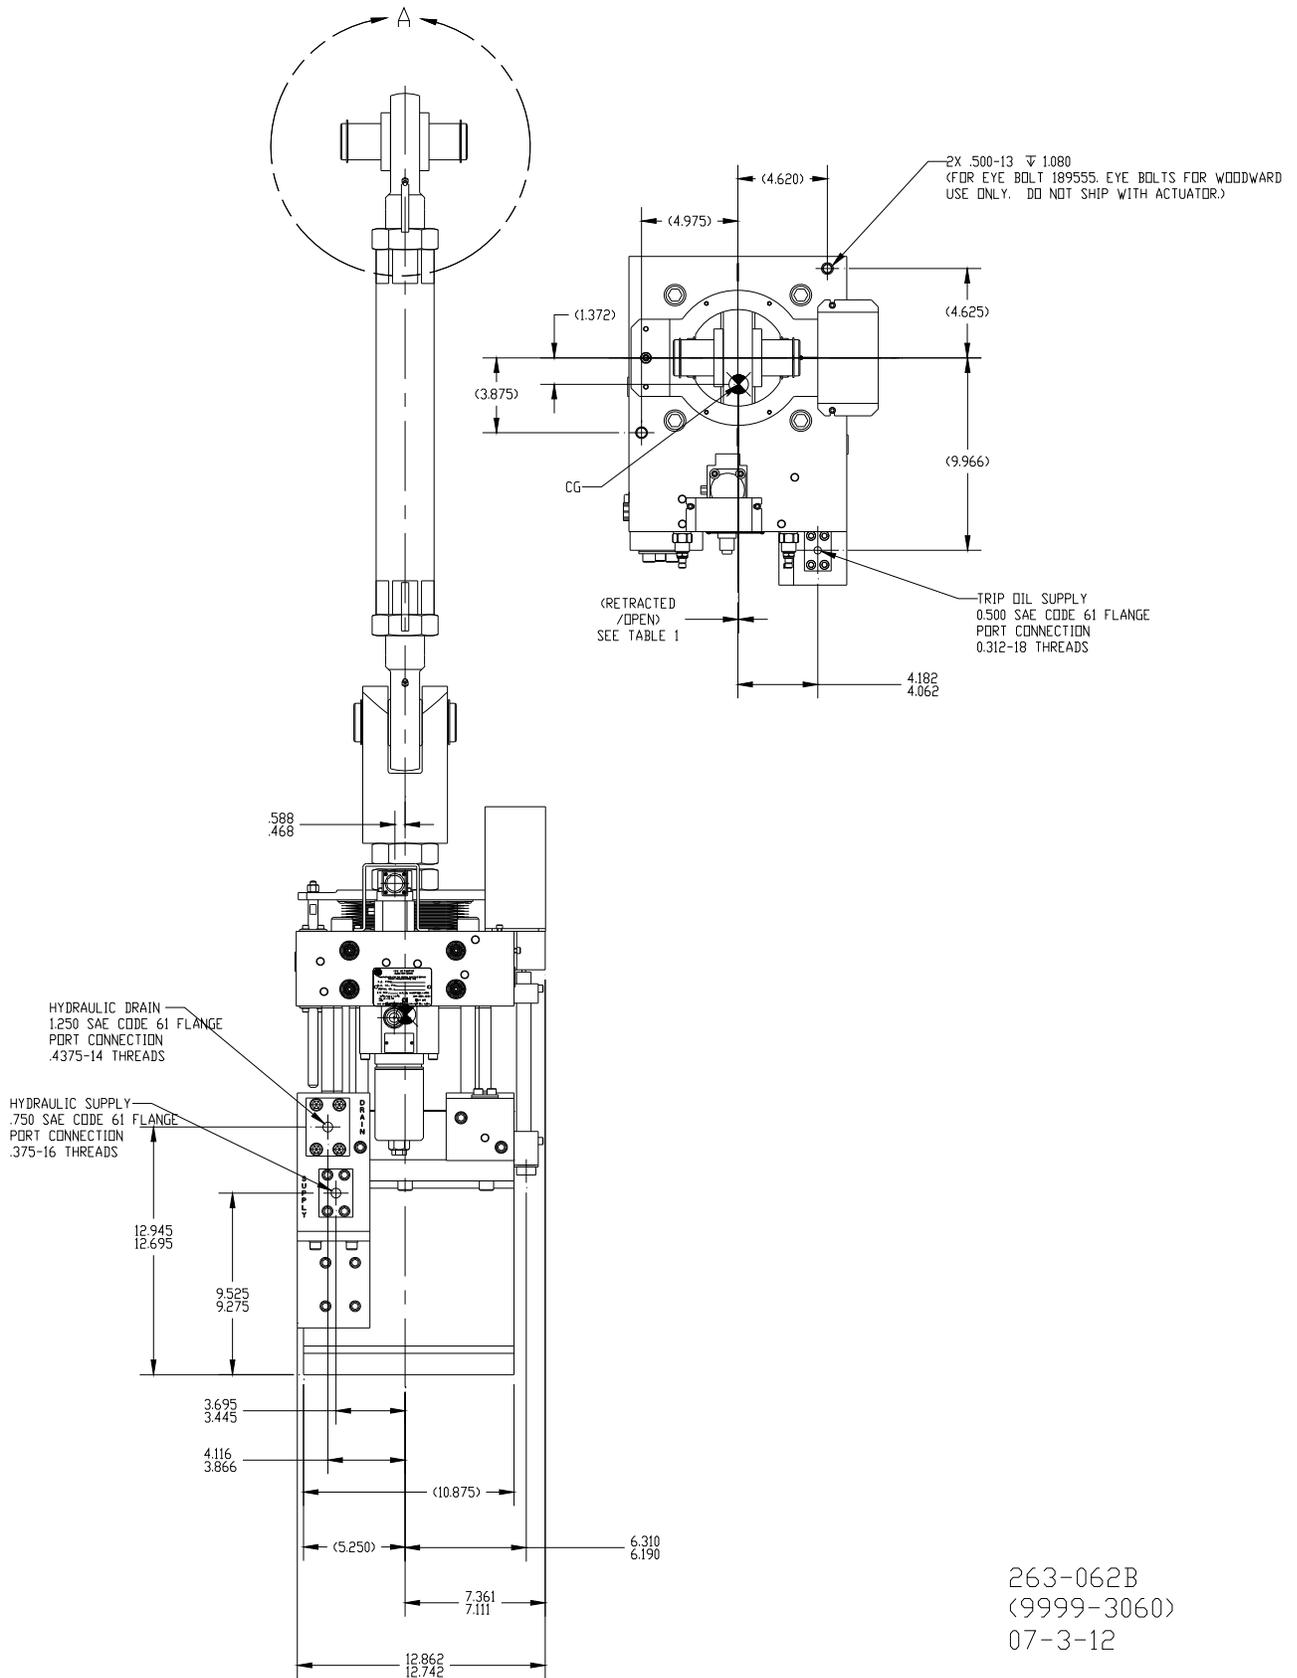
9F IGV Actuator, High Pressure Trip without internal check valve
